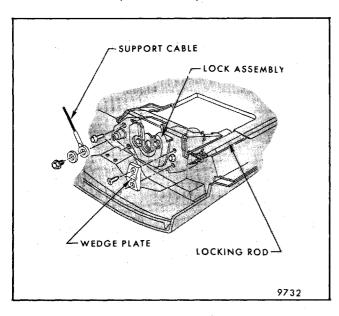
Tailgate Lock Assembly, A-35 Style
